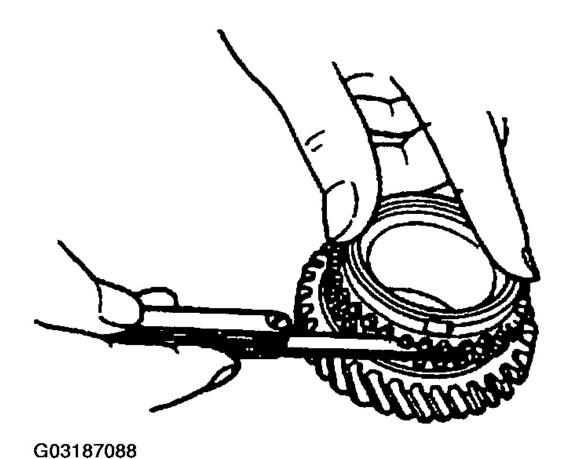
Measuring Clearance Between Synchronizer Ring & Flank Surface Of Gear Courtesy of MAZDA MOTORS CORP.
